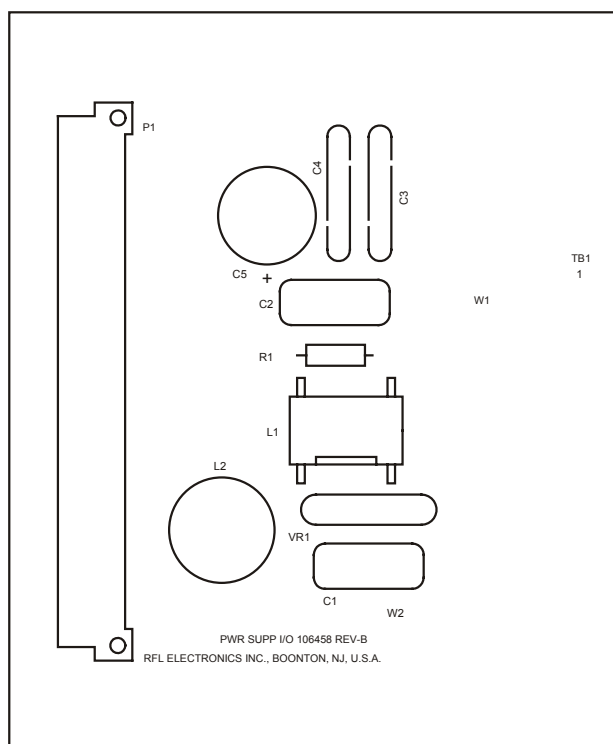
Component locator drawing, Single Power Supply I/O module
